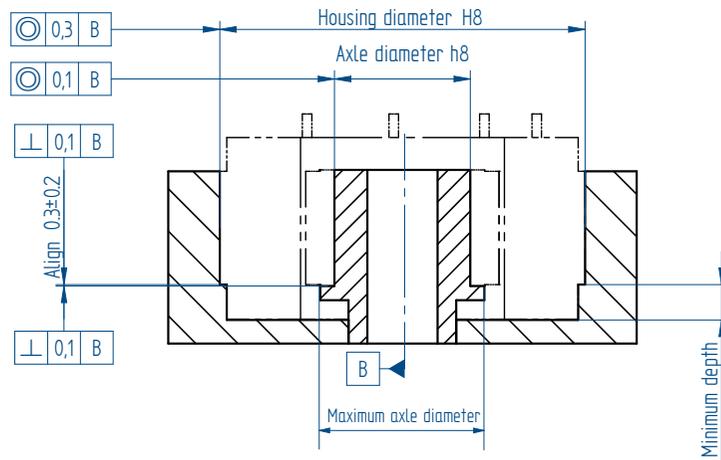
QTR 65 and QTR 78 housing requirement tolerances for mounting/centering purposes
